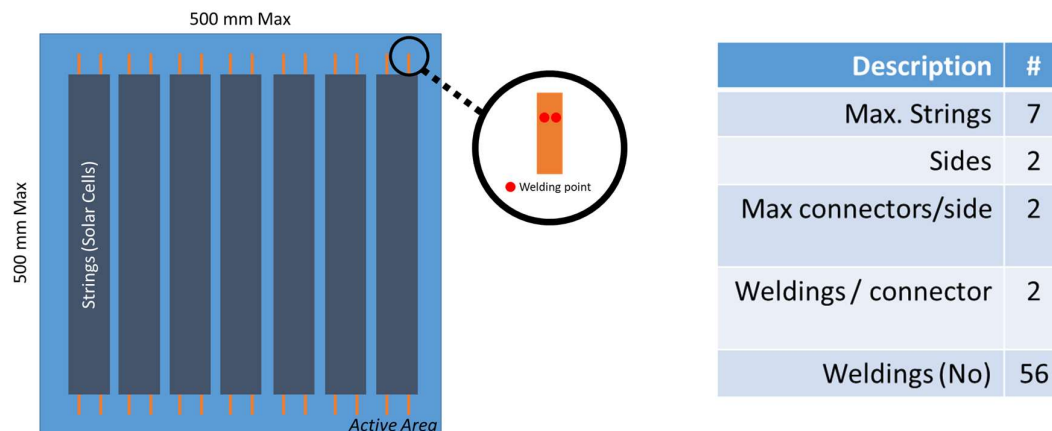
Nominal configuration and an example of number of welding which could be done by the welding machine.
